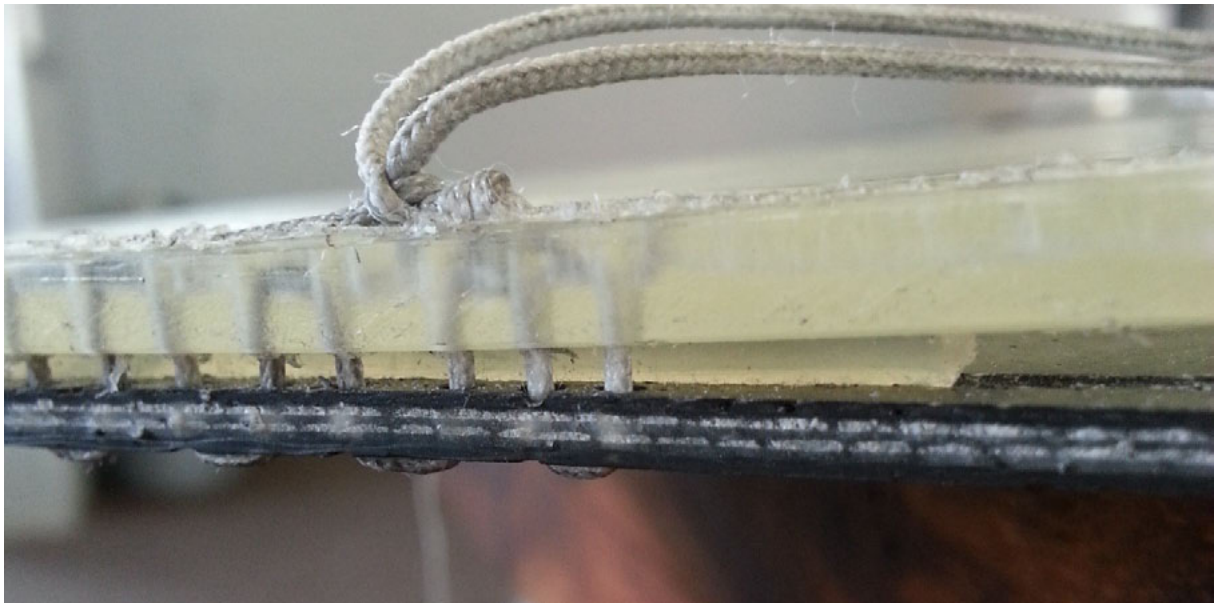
CFRP-TPX Stitched Seal Prototype
